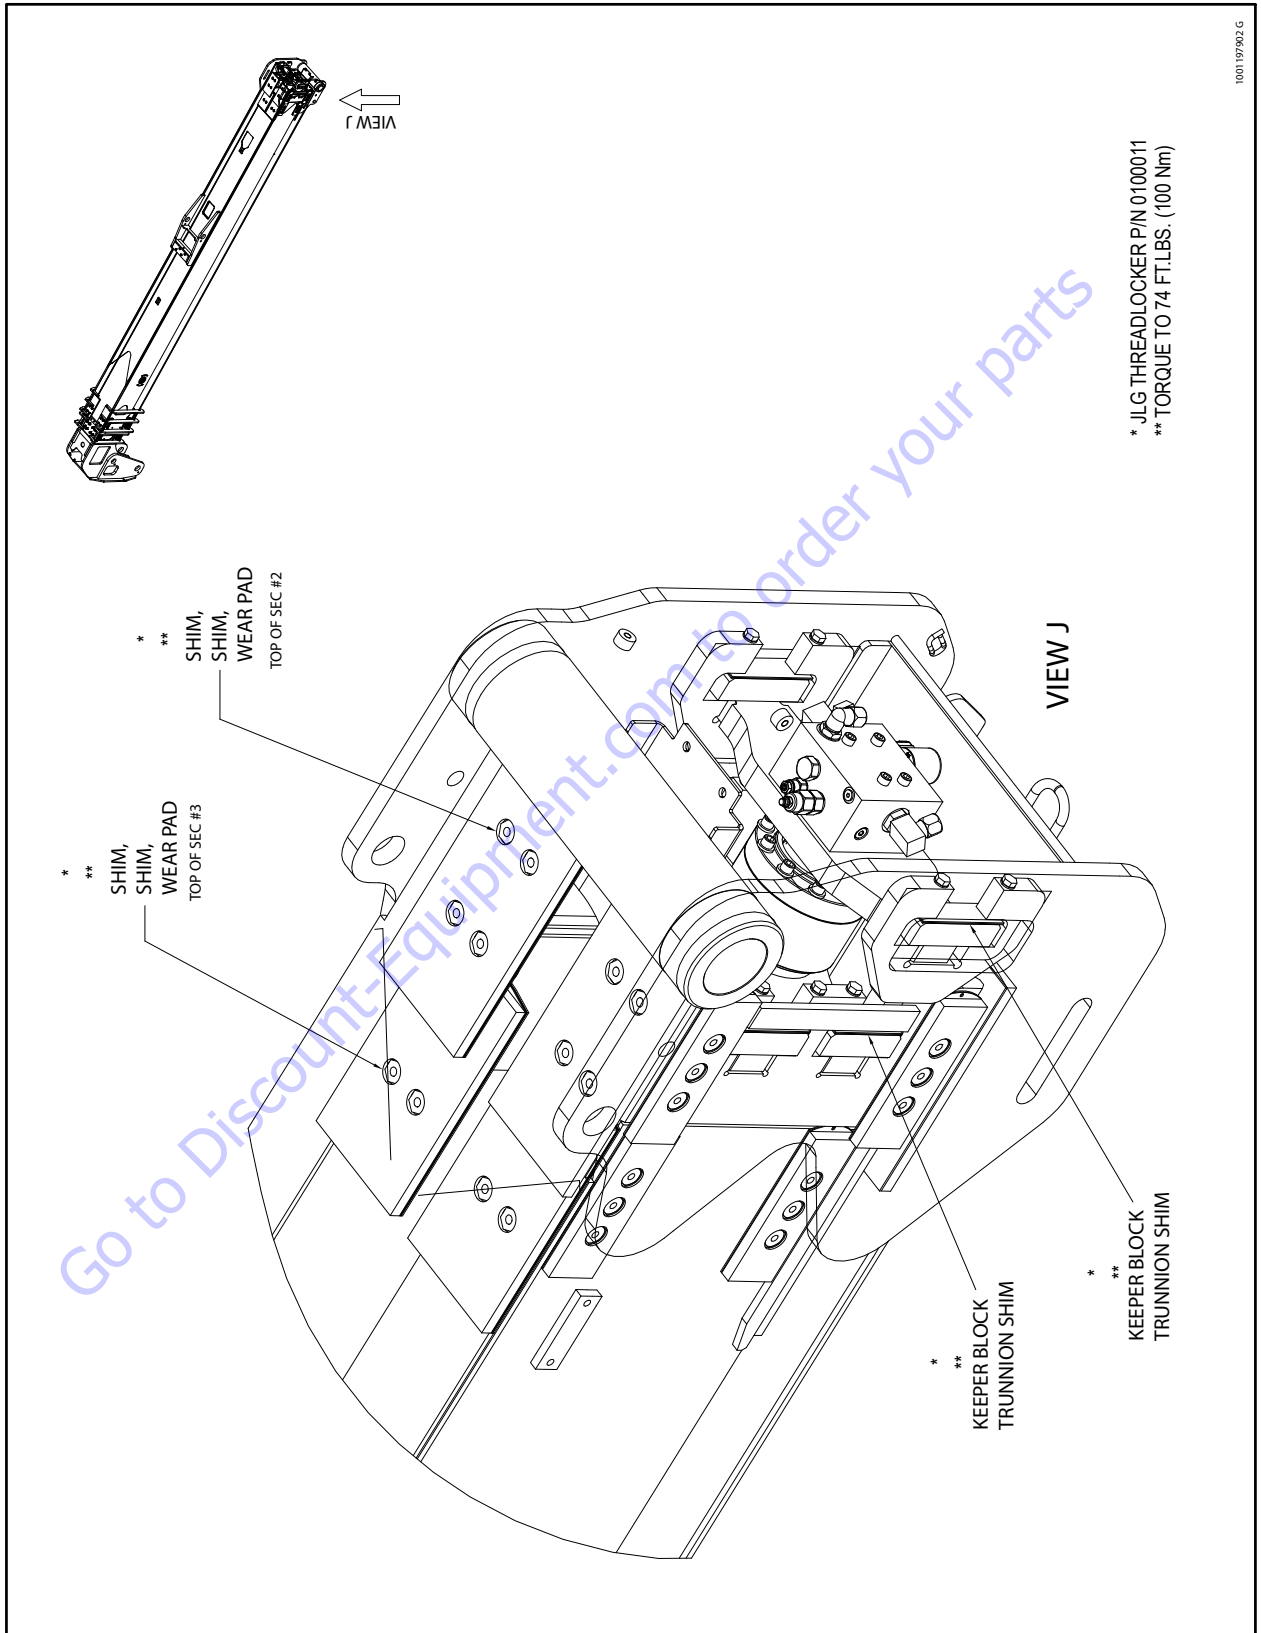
Tower Boom Assembly - Sheet 5 of 6
